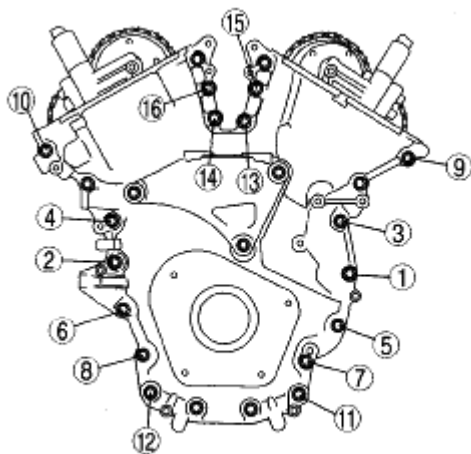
Identifying Engine Front Cover And Engine Mount No. 3 Bolt Tightening Sequence
